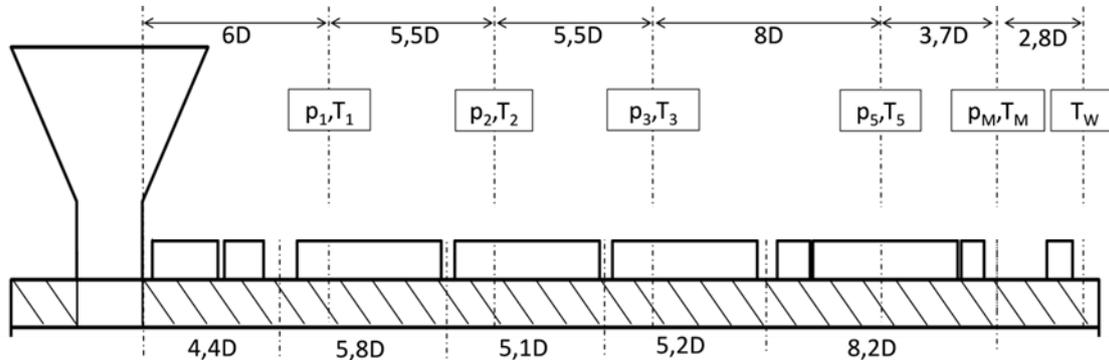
Single screw extruder ($D=45\text{mm}$) with several sensors
